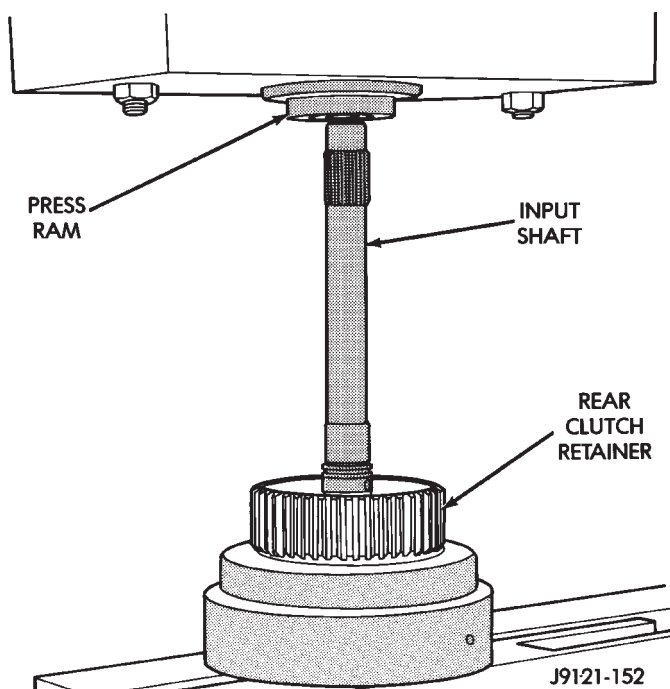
Pressing Input Shaft Into Rear Clutch Retainer
